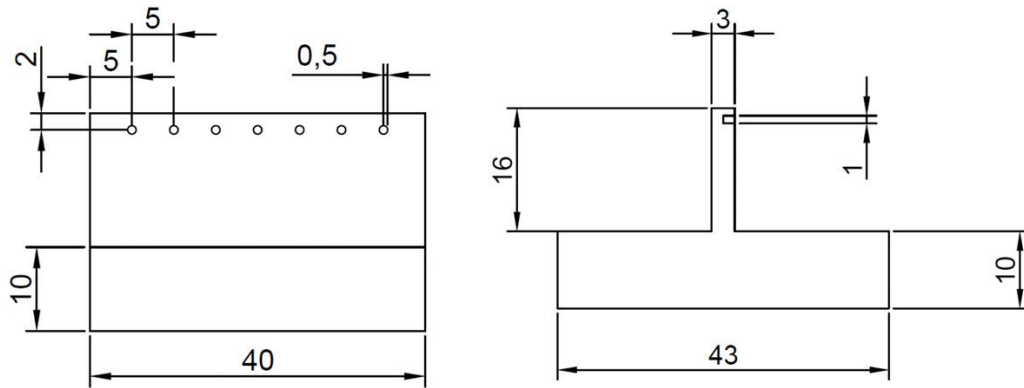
Substrate schematic side and front view that shows showing the thermocouple's holes locations (all unite is in mm)
